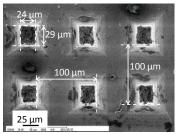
Details of mold used in roll press technique: SEM image of tungsten carbide mold produced by blade cross-cutting.
